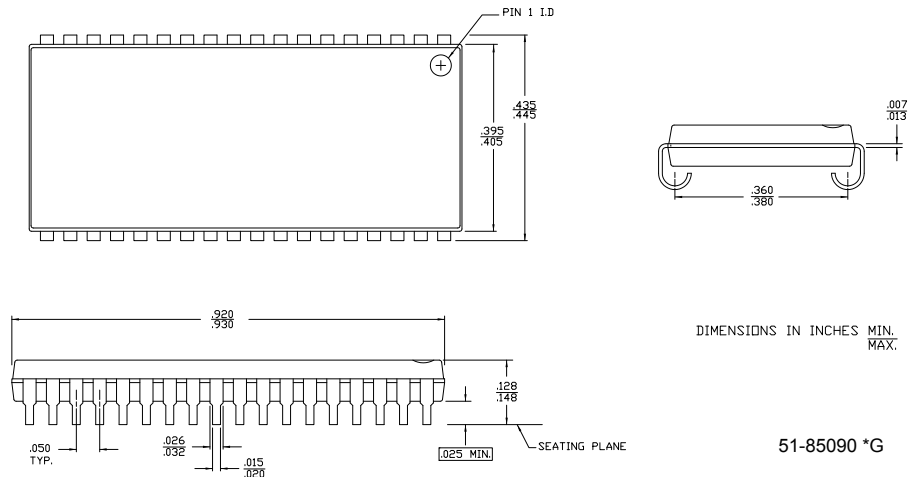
36L SOJ V36.4 (Molded) Package Outline, 51-85090
